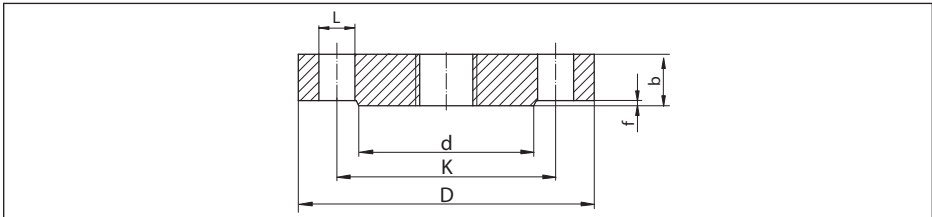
Dimensions: DIN flange DIN 2501 (seal ledge DIN 2526 Form C)
